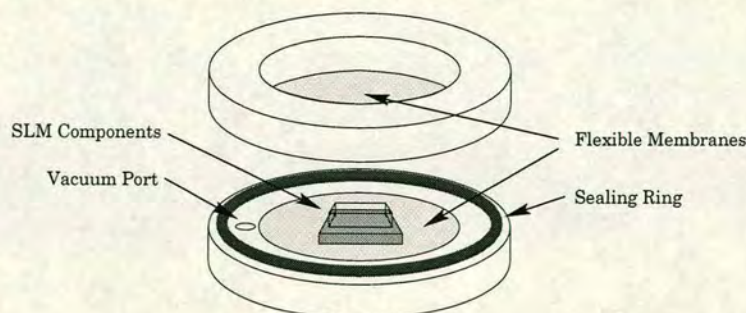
Diagram of the vacuum packing rig used in SLM assembly.
